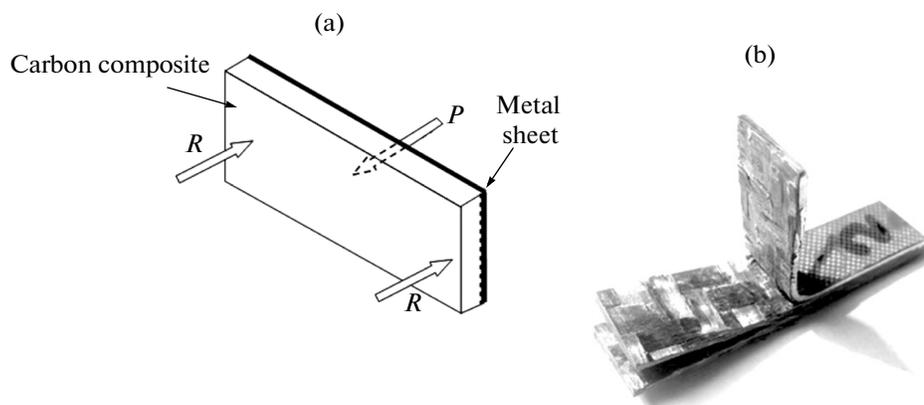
(a) Test scheme on a impact-testing machine and (b) view of a sample with microrelief plated layer obtained via DC after tests.
